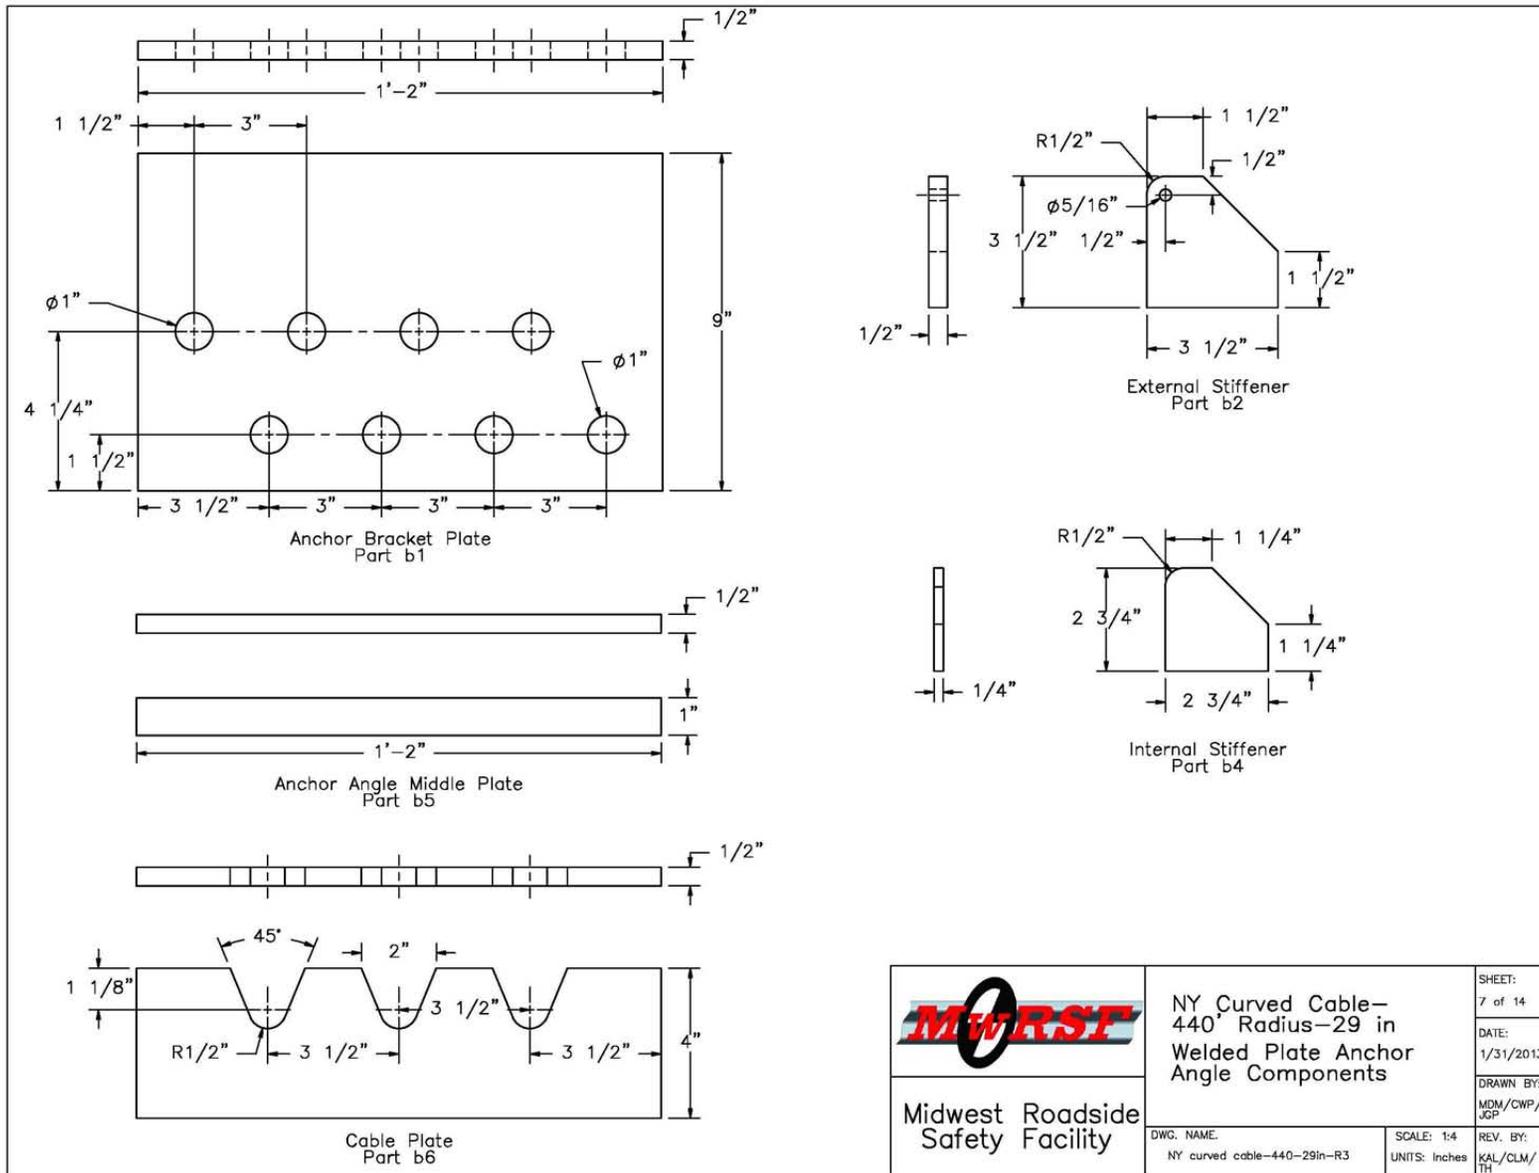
Cable Anchor Bracket Component Details, Test No. NYCC-3
